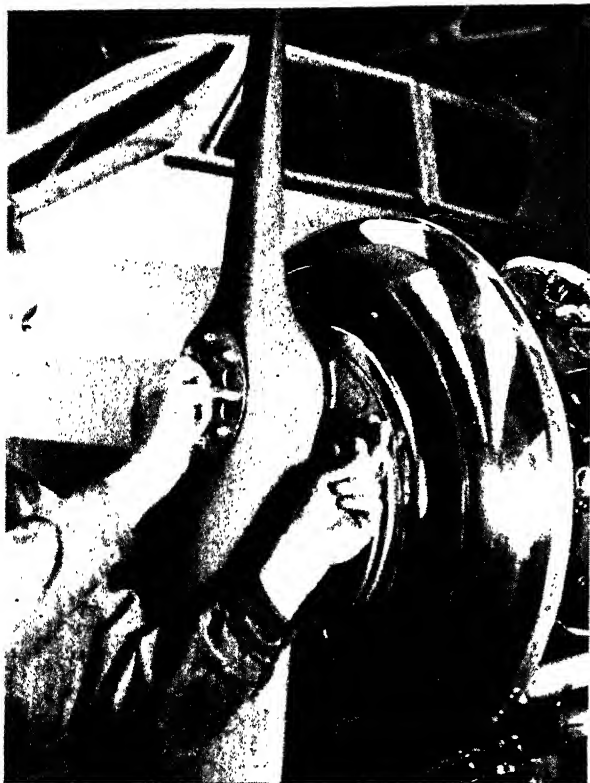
CHECK AIRSCREW HUB BOLTS FOR TIGHTNESS
